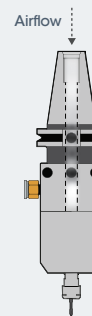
A 625XHSK-A63 with Thru-Toolholder Air Supply (TSA) Air Turbine Spindle® mounting. All HSK spindles can be used with center air feed if the air supply line has sufficient ID.
